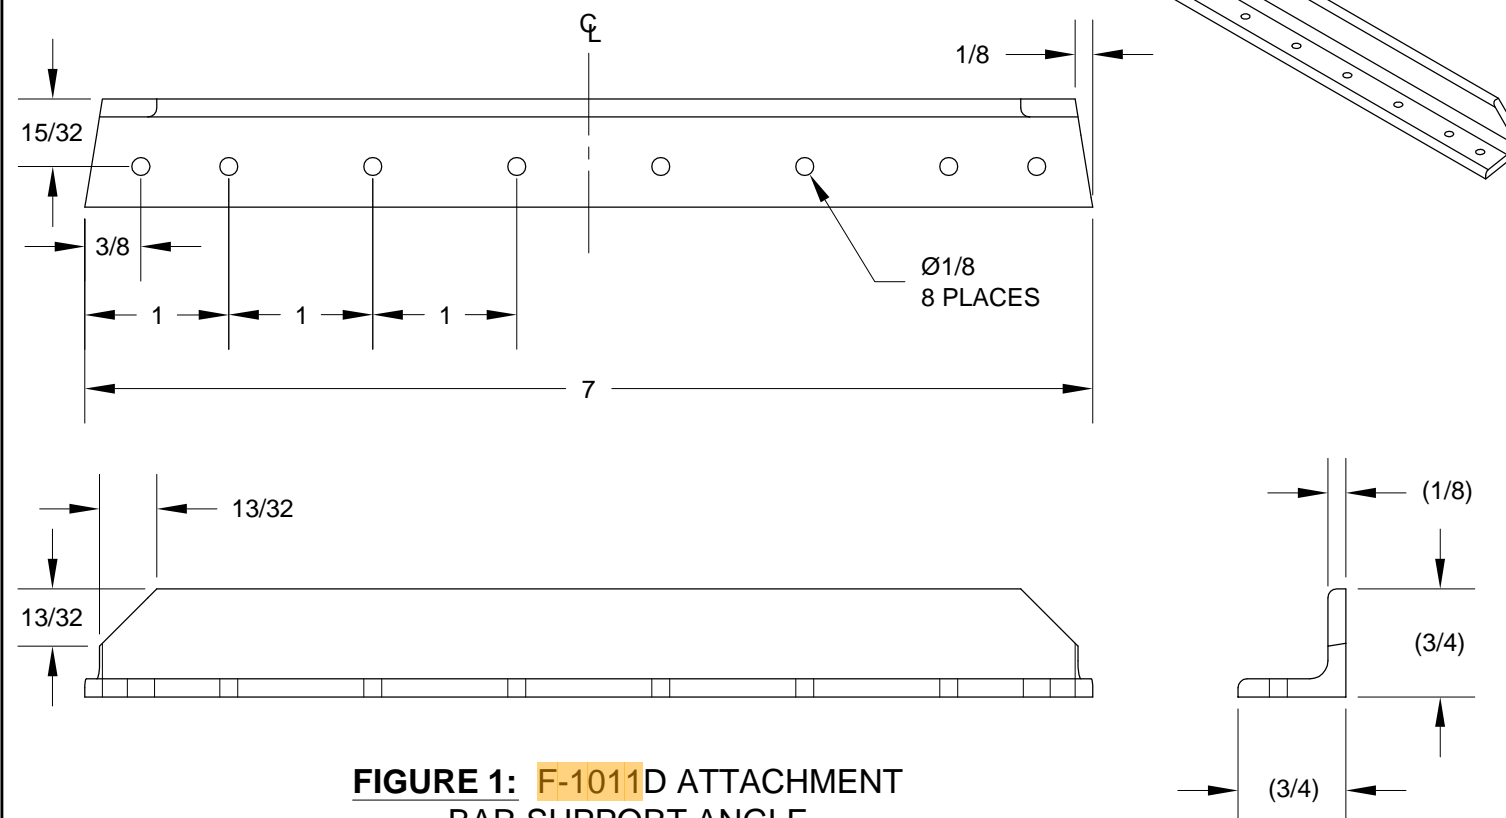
F-1011D ATTACHMENT BAR SUPPORT ANGLE
